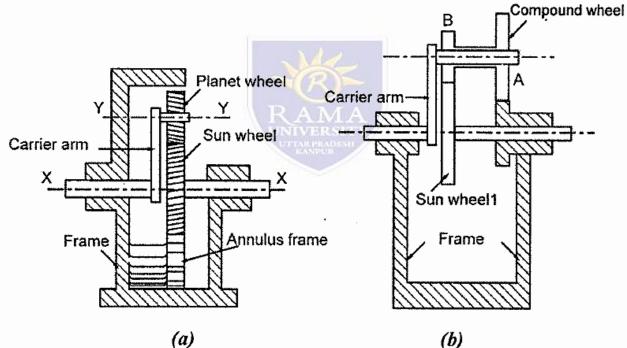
Epicyclic gear box Department of Mechanical Engineering
